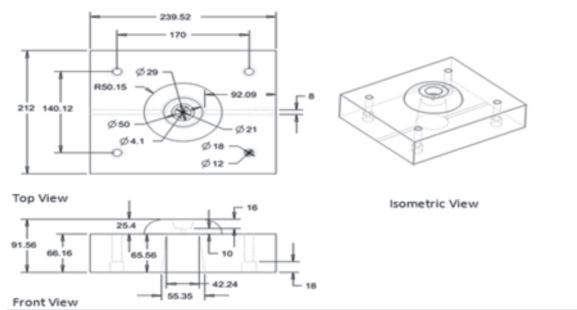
Drawing with dimensions of a drag of mould (mm) and isometric view as well
